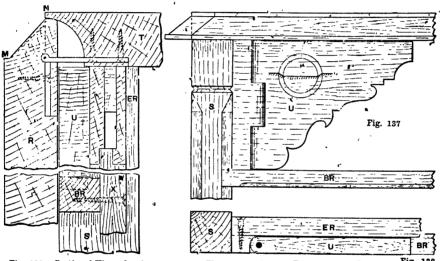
Sectional View showing Hingeing of Sideboard Flap.
